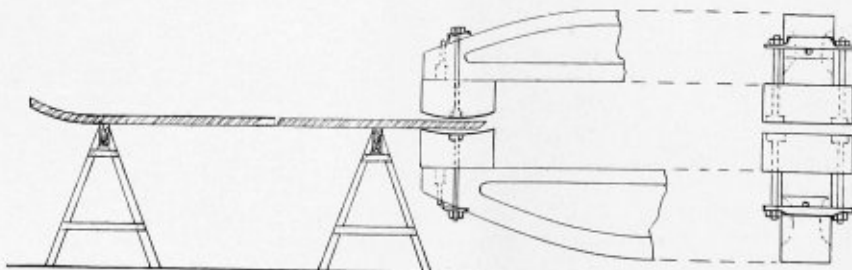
SETTING UP THE ENDS OF SHEETS WITH A RIVETING MACHINE.
